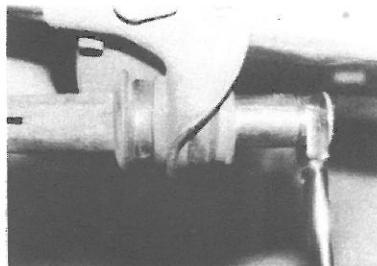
Torque to manufacturer's specifications. (Notice difference in Bushing compression compared to Fig. 1.)
